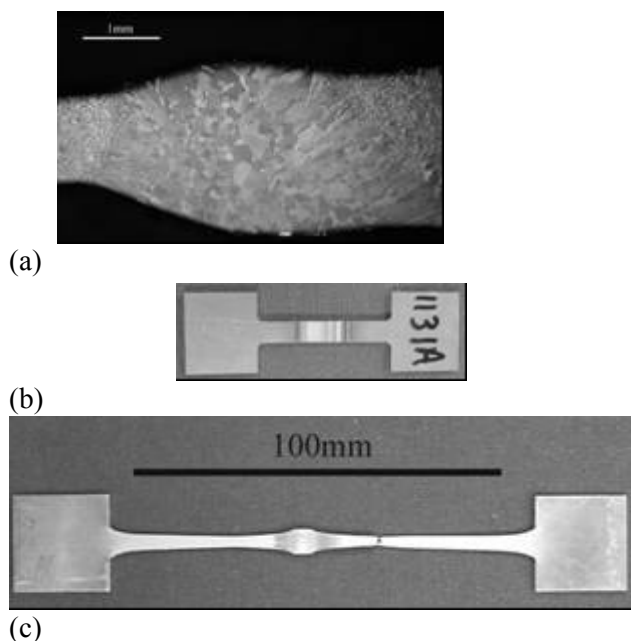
(a) Weld nugget region in a butt weld between aluminum sheet materials showing coarse, cast microstructure of a fusion weld. (b) Transverse tensile specimen (c) Transverse tensile test at SPF conditions shows the undeformed nature of the fusion weld metal.
